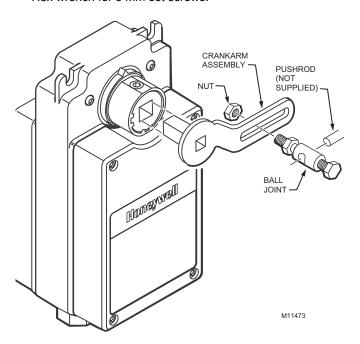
Attaching the 205830A Crankarm Kit to the actuator.
